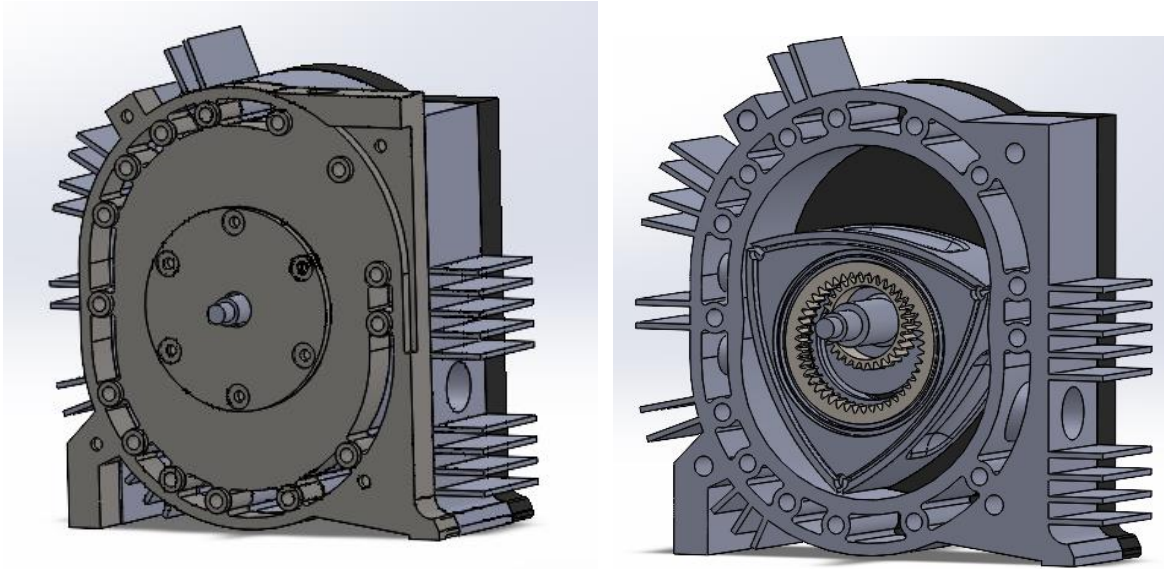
Highlighting the complete assembly of our 1 rotor Wankel Rotary engine on Solid Works.
